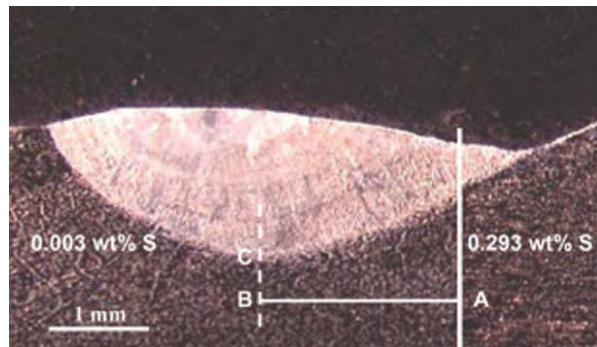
Weld geometry when welding two stainless steel plates with different sulfur contents. The white vertical line passing through point "A" indicates the original interface of the two plates. The location of maximum weld penetration is indicated by point C, and AB indicates the shift of the maximum penetration from the original joint of the two plates (Ref. 14).
